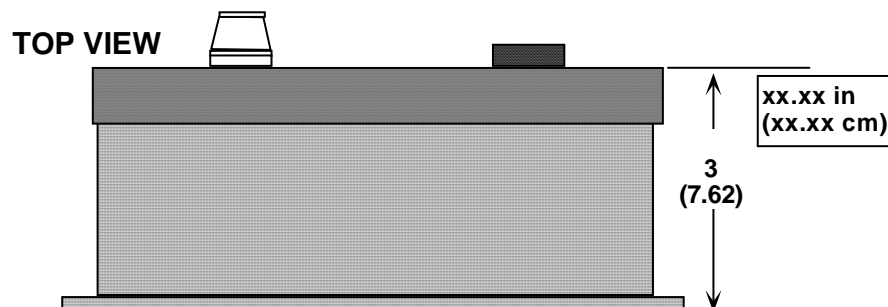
Bar Control enclosure mounting dimensions (top views)
